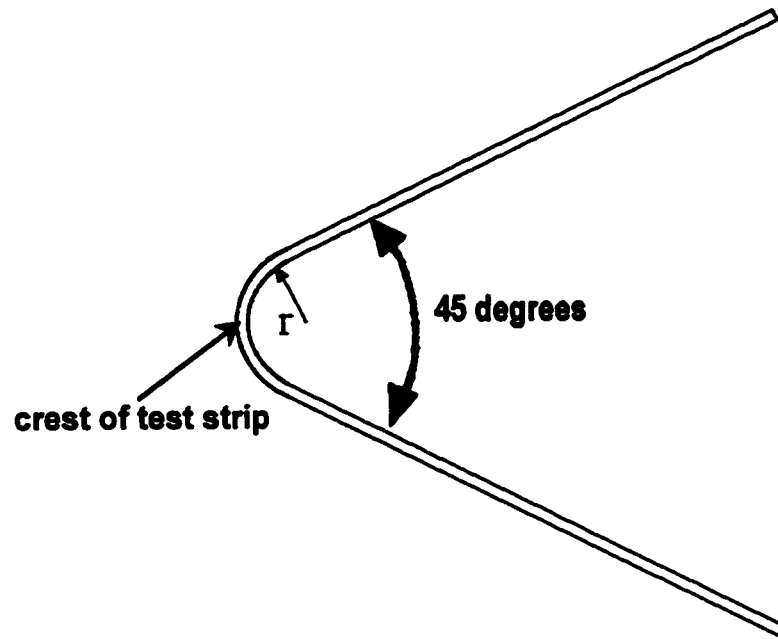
Strain Reversal Material Test Strip Bent to Specified Radius
